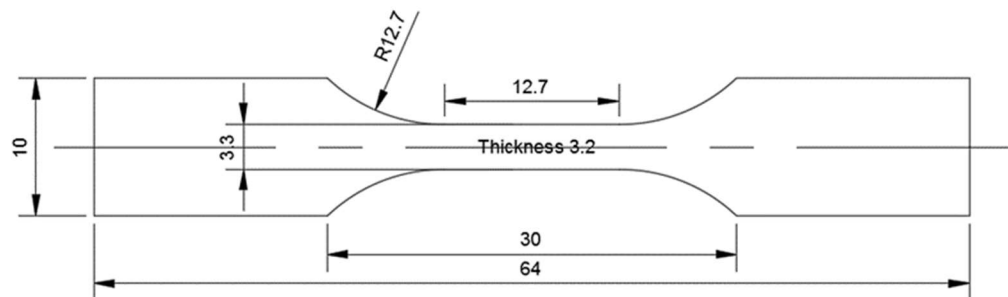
Dimensions of tested specimens produced in this study (unit in millimeter).
